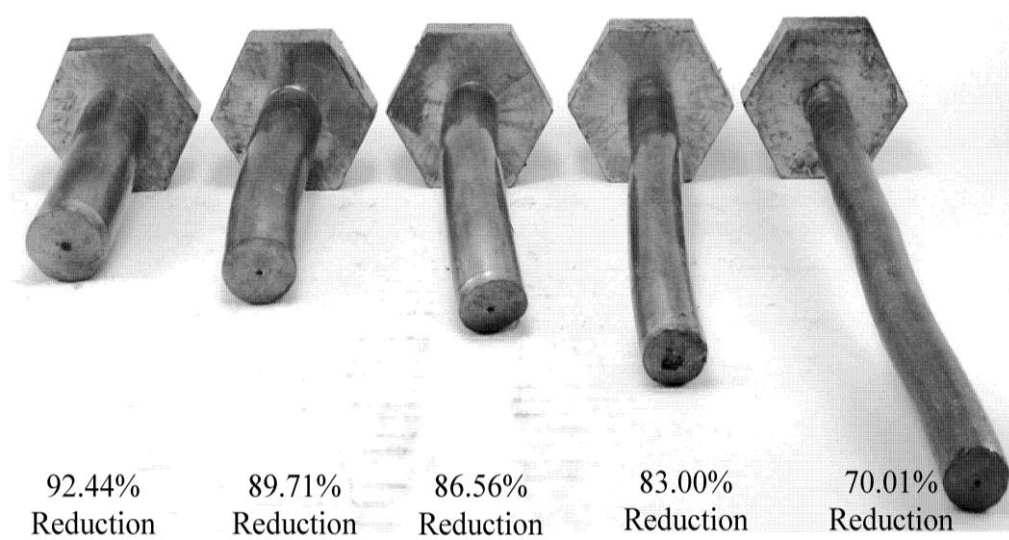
Extruded forward extrusion-forging triangular head shaped product
